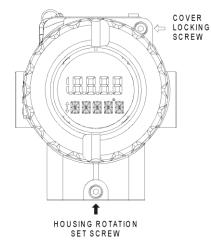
Cover Locking and Housing Rotating Set Screw
